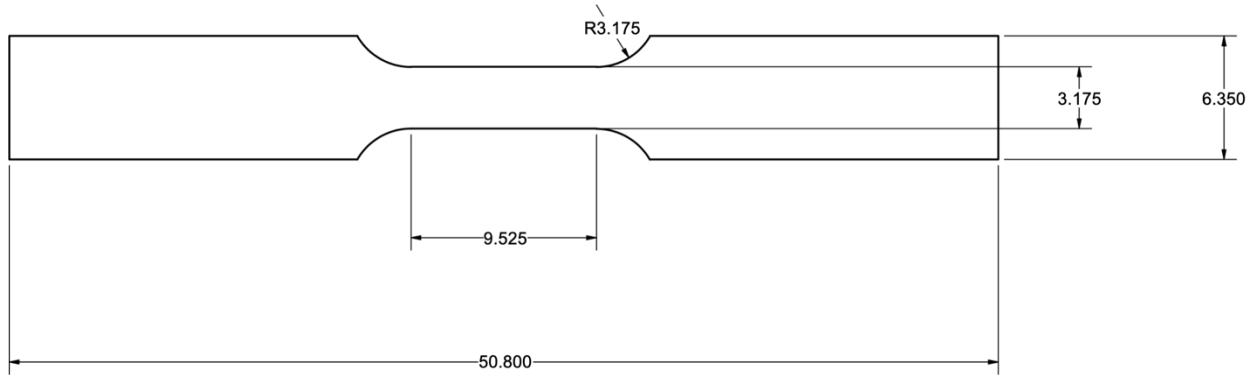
Dimensions of tensile specimens taken from U-die DHPF parts, in mm.
